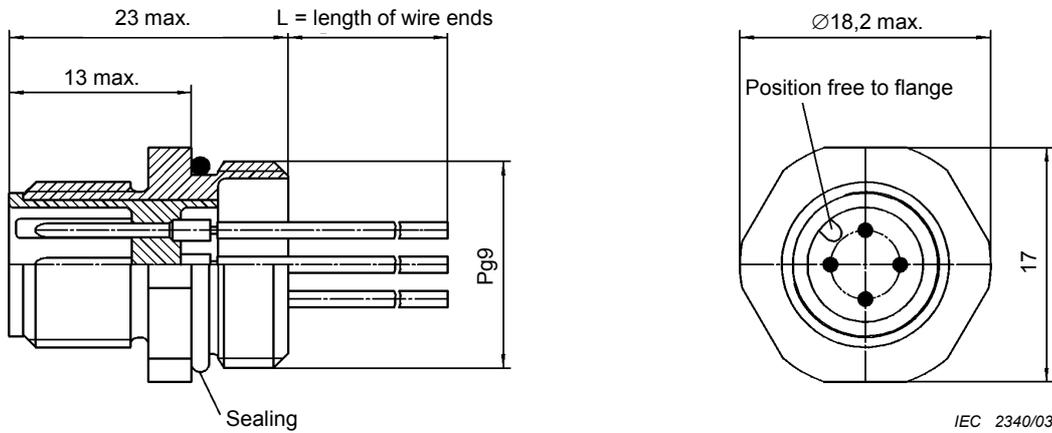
Fixed connector, with wire ends, single hole mounting Pg9, male contacts
